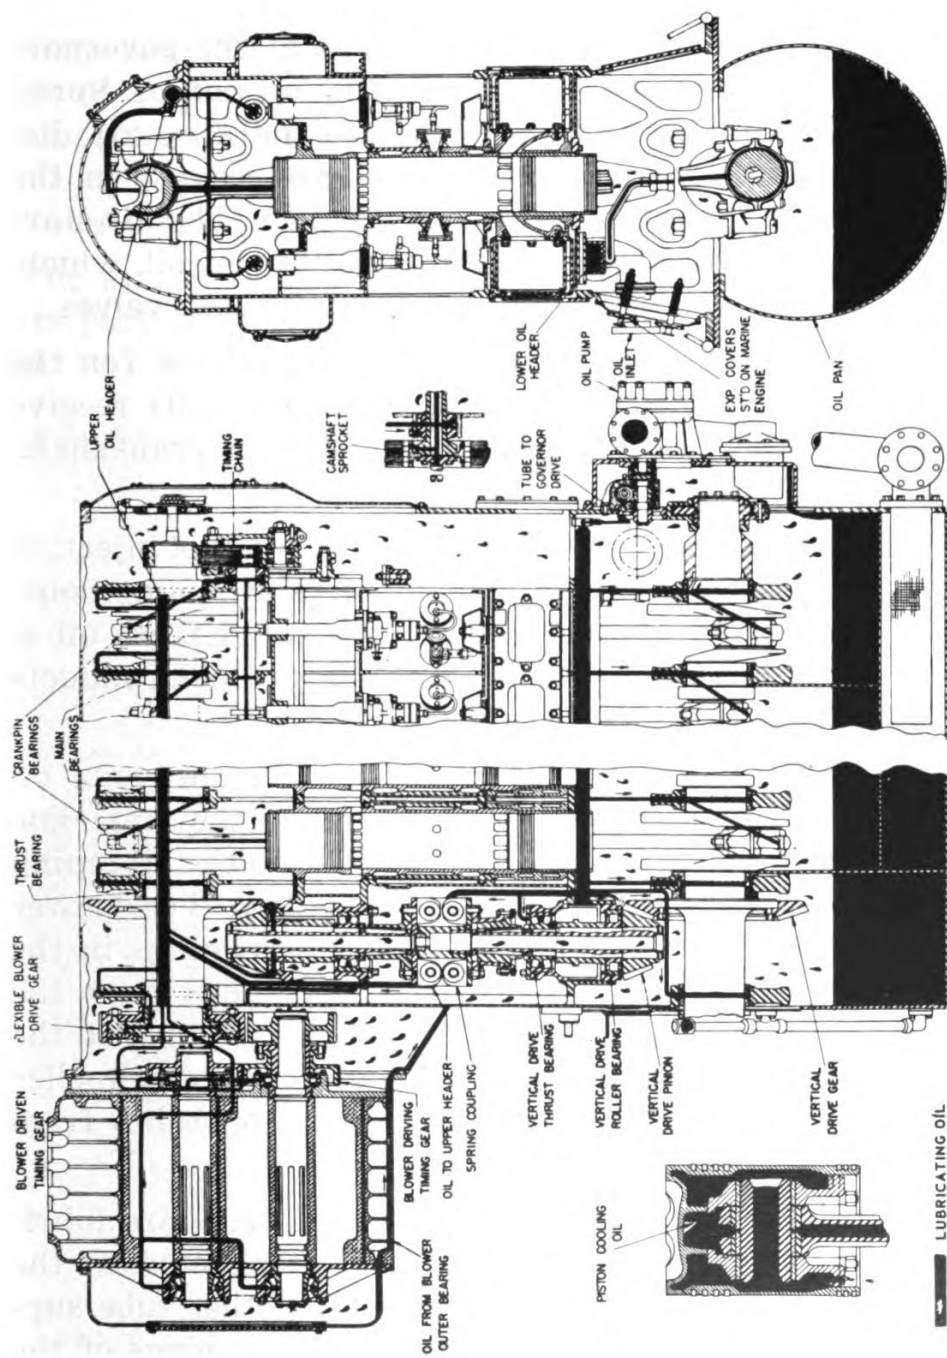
Internal lubricating-oil system of an opposed-piston engine (FM 38D8 1/8).
